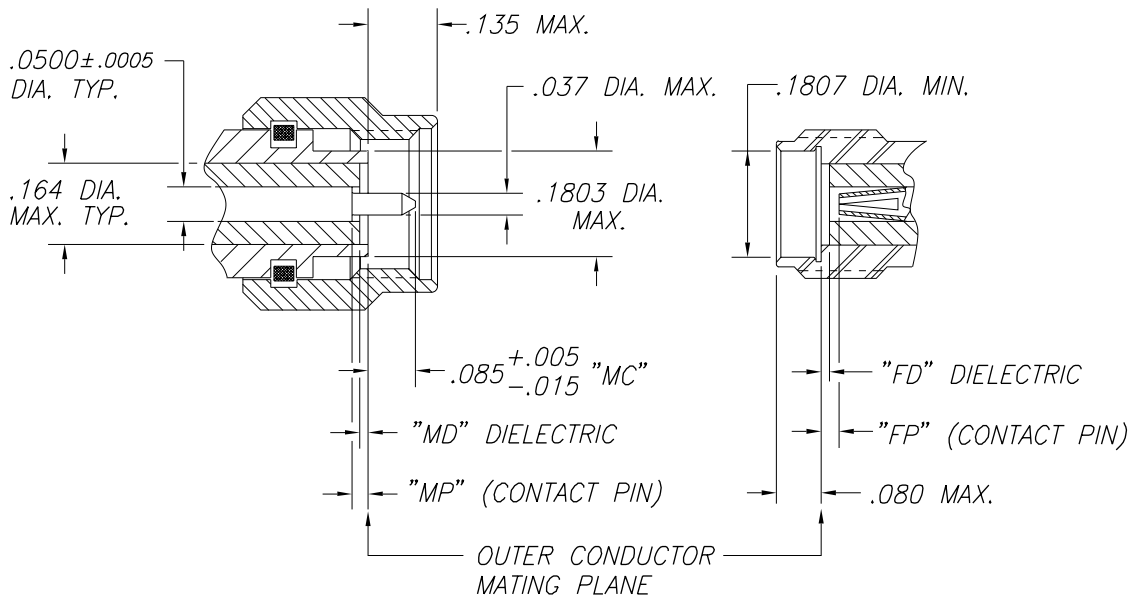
Critical Axial Interface Dimensions of SMA Type Connectors
